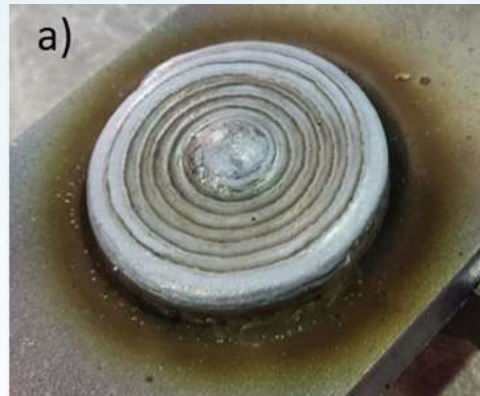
Example of solid cylinder manufactured by WAAM with a spiral trajectory (a few superposed layers) – FRONIUS CMT welding device
